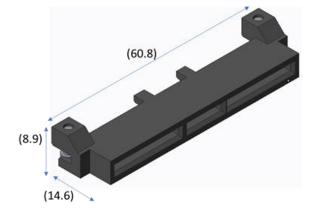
168-pin Base Board Primary Connector – Straddle Mount
